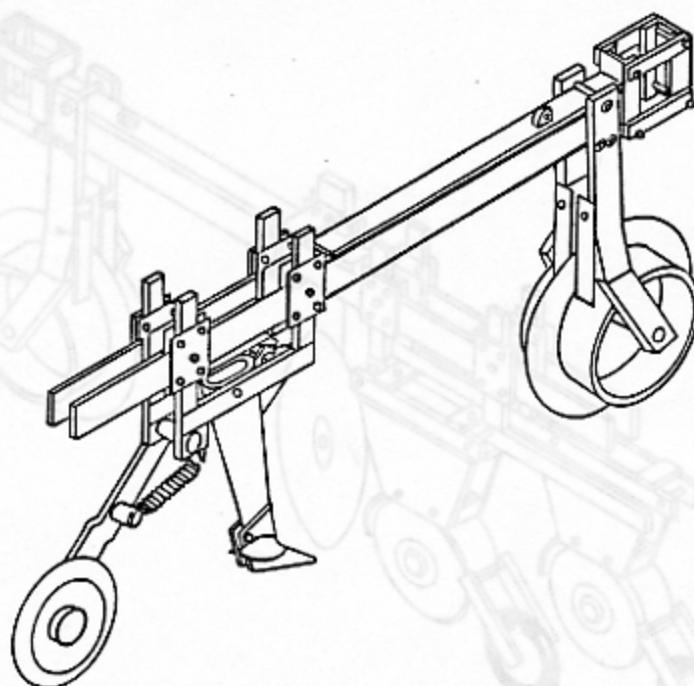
Single drill unit with coultter gauge wheel winged hoe to remove 5 cm wide strip of atrazine treated soil, and 10 by 30 cm Vee press wheel.
